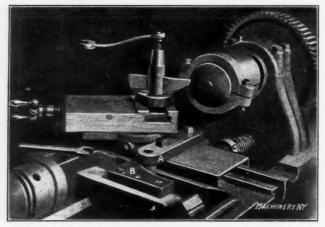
Lathe equipped with Forming Slide for Turning Spherical End of Piston
